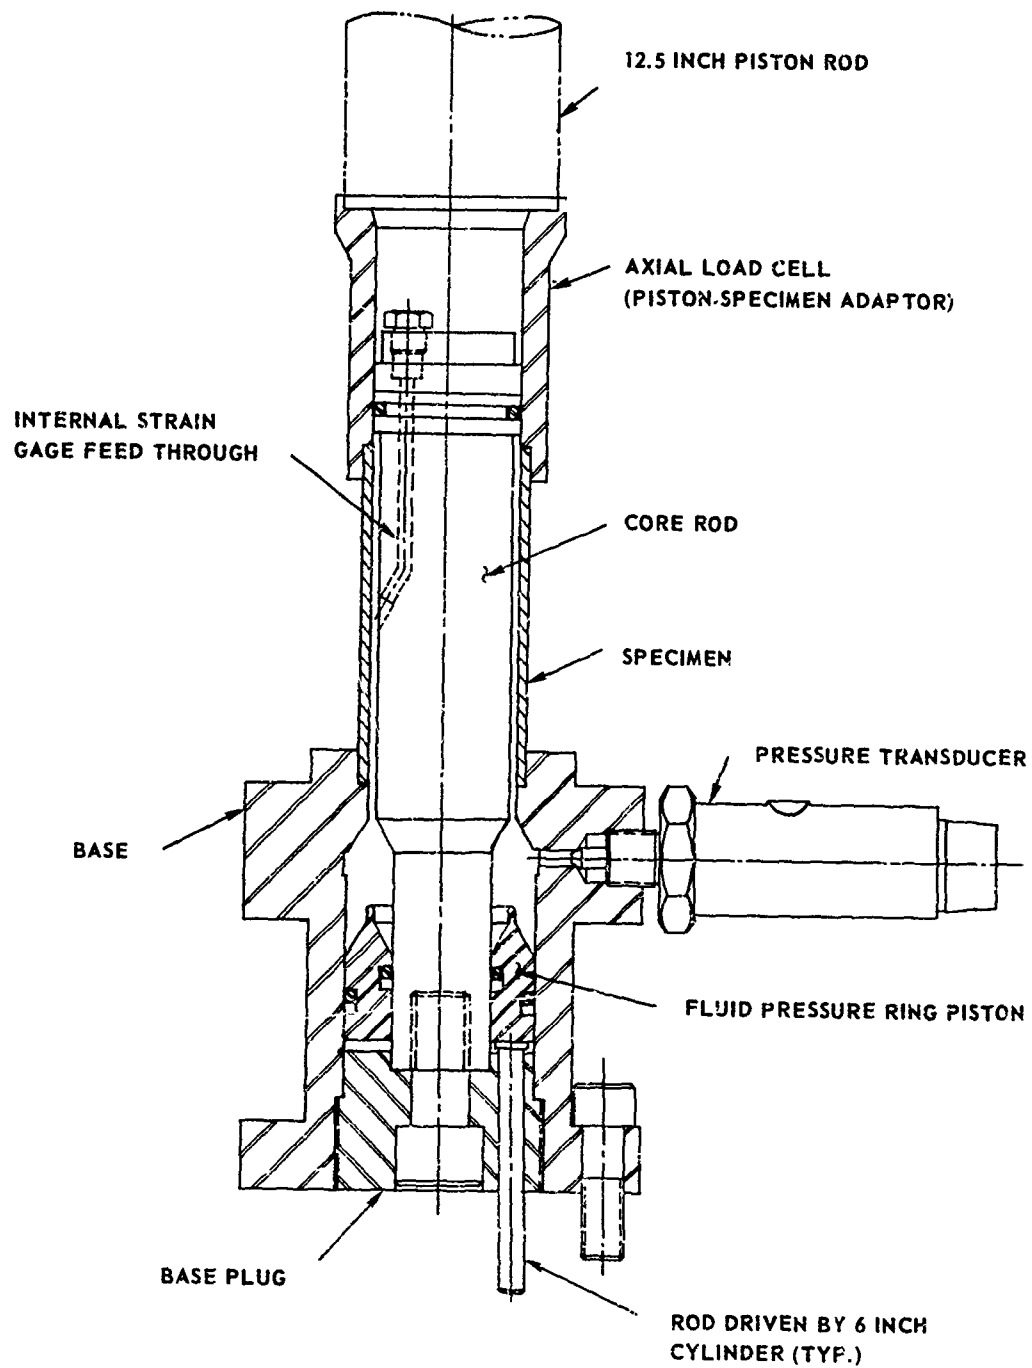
Sectional View of Specimen Package for Axial Compression and Circumferential Tension
